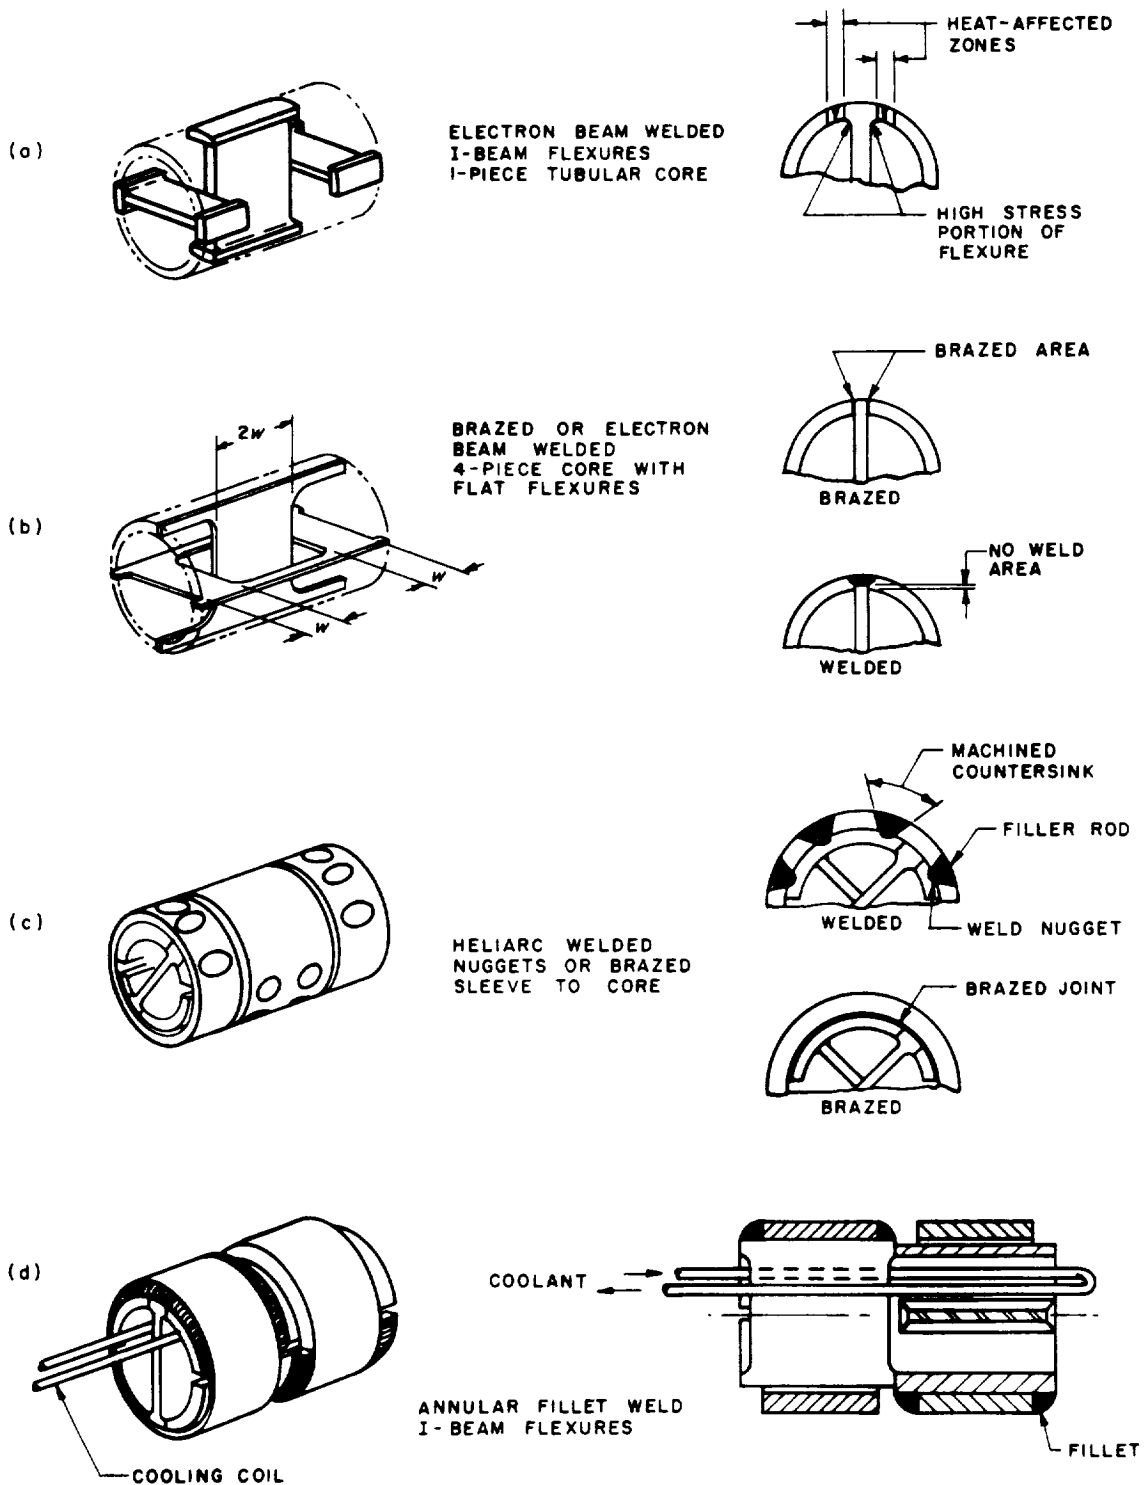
Fabrication of brazed and welded assemblies
